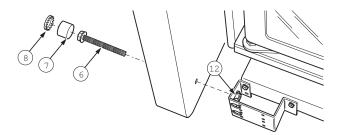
A. Fasten Lower Front - ALL Models Except RLT
